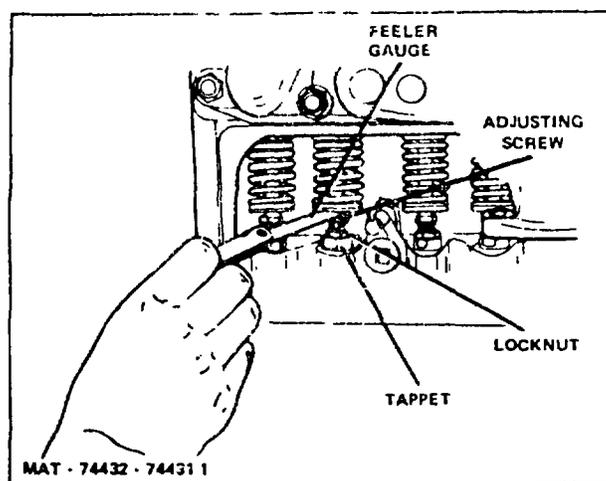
Checking Tappet Clearance Engine at Room Temperature
